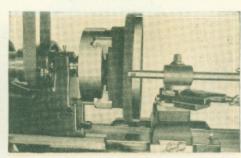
Turning a Balance Wheel 22" in diam. Using Heavy Duty Turning Tool
